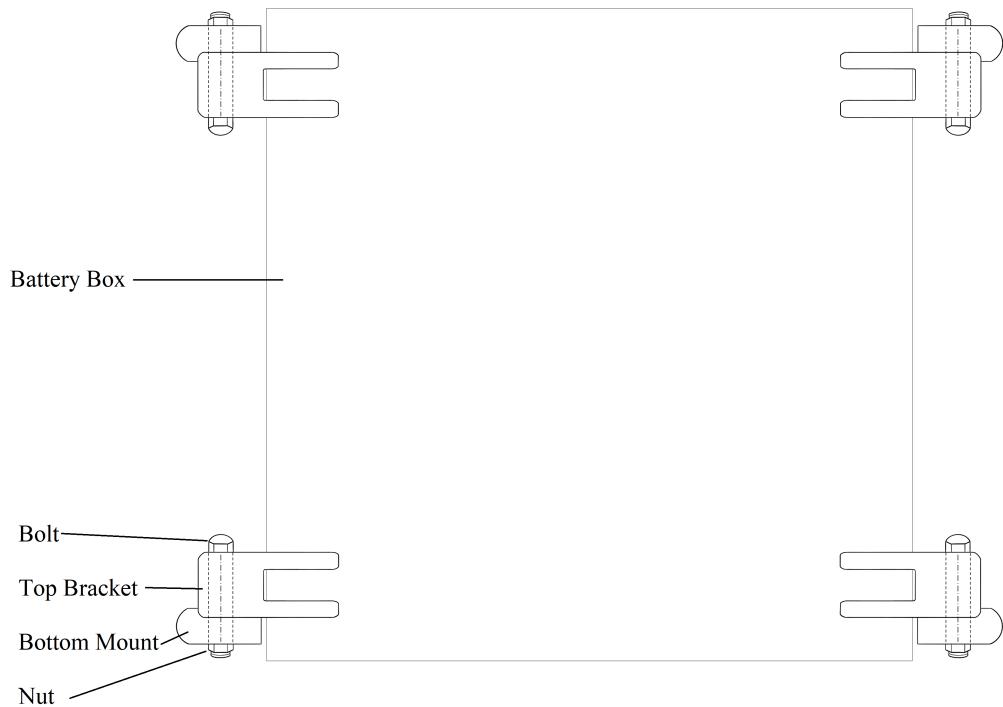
Front View of Top Bracket Welded on to the Battery Box
